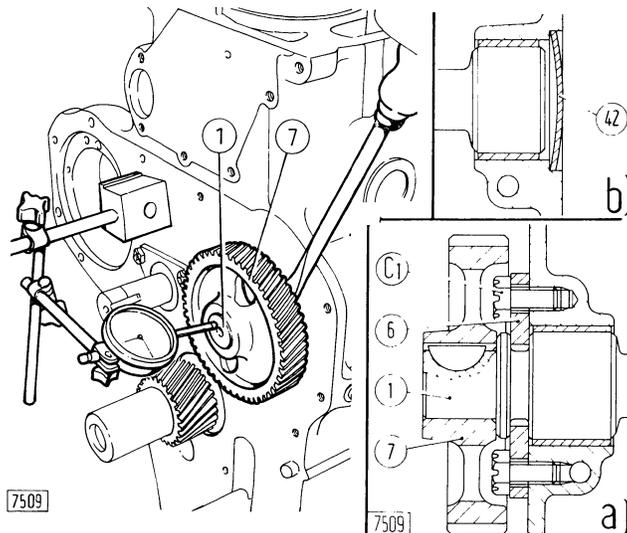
Checking Camshaft End Float Using a Dial Gauge
